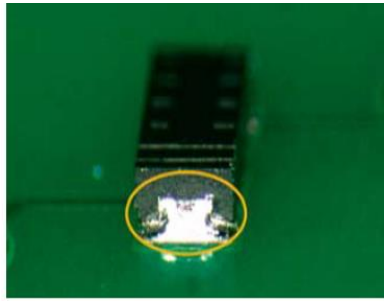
Example DFN1608 appearance of side wettable flanks after soldering
